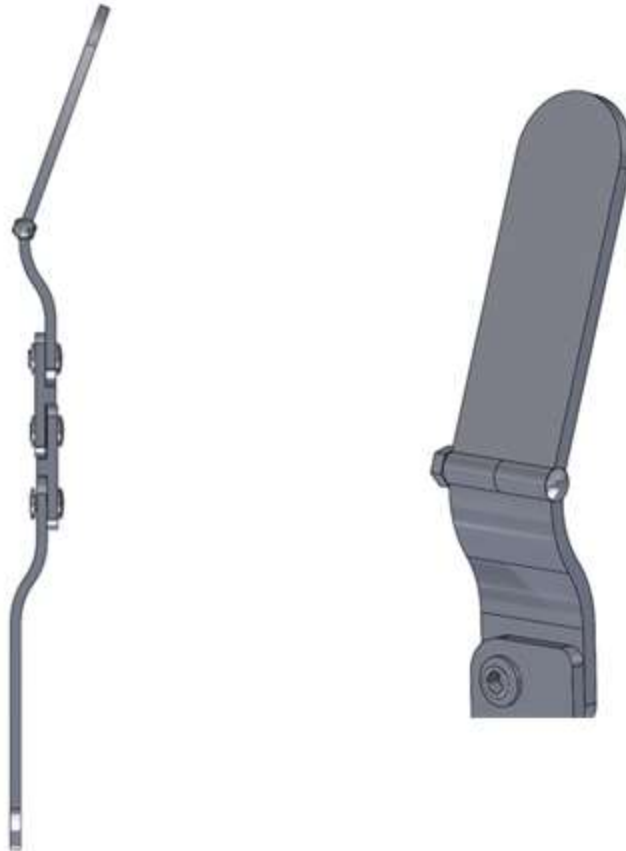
Side and close inside view of the Adjustable-Hinge design.
